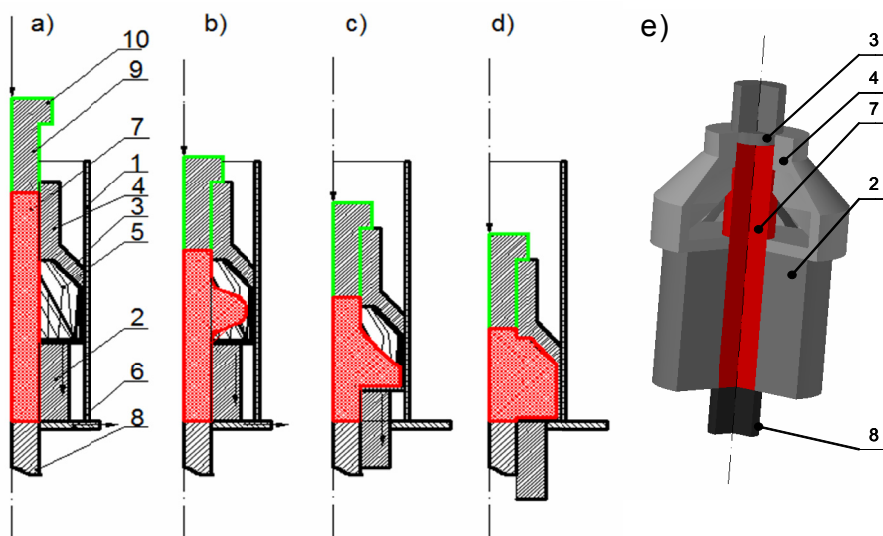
Schematic diagram of the process; a) initial state, b) upsetting in the chamber, c) radial extrusion, d) finished product, e) model CAD of the tool for simulation of the inverted conical die gear forging process
